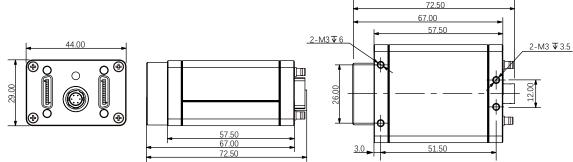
Mechanical Dimensions (in mm) for Cameras with 29 \* 44 \* 58mm housing (single port).
